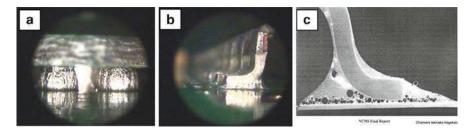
(a) BGA lead-free solder joints exhibiting a duller appearance; (b) SOP joint; (c) Lead-free solder joint with voids
